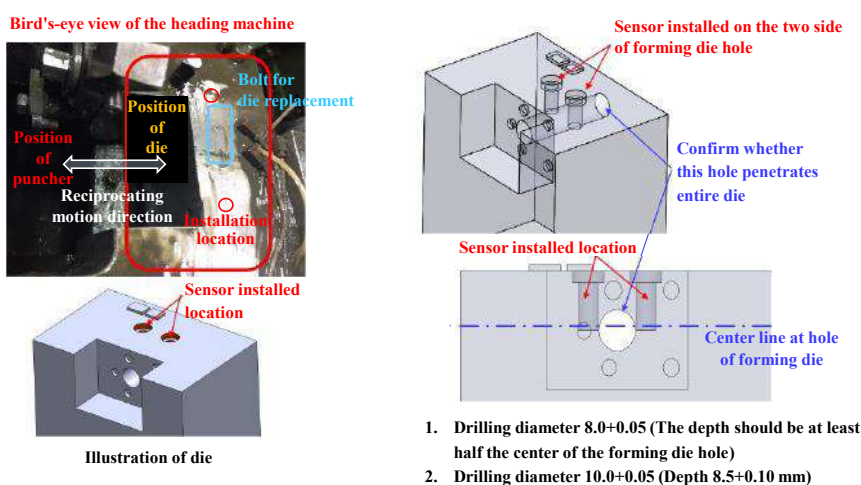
Installation Position on Both Sides of the Forming Hole at the Mold End
